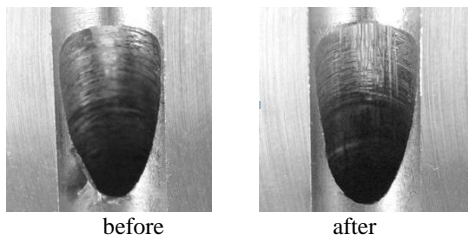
Deburring test results of SCM440H specimen. The primary hole diameter of the specimen is 6.5mm, the secondary hole diameter is 6mm and intersecting angle is 40°.
